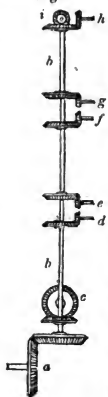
is an example of such gearing as is employed in cotton-mills, everything beyond the actual wheels and shafts being omitted, for the sake of distinctness. *a* is a large bevil-wheel mounted on the main shaft of the steam-engine, and turning the large bevil-wheel at the bottom of the upright shaft *b b*, which rises through several floors of the factory, and carries several bevil-wheels of smaller diameter, which impart motion to the wheels and shafts *c, d, e, f, g, h, i*, and *i*, in the different stories of the building.
